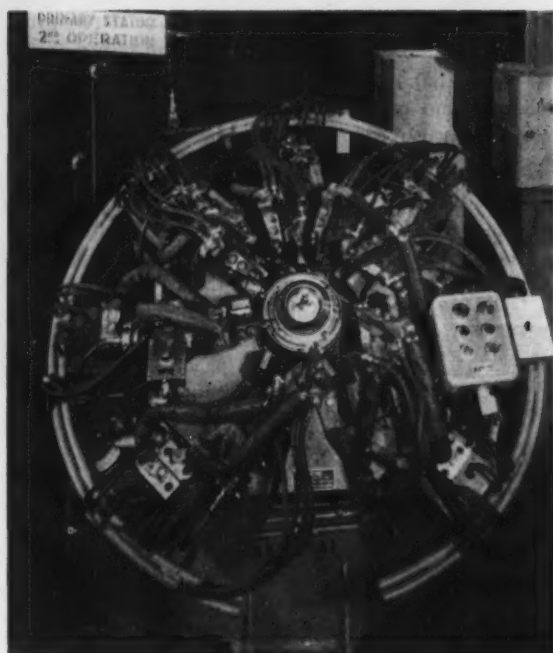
This is the arrangement used in welding the vanes of the primary stator to the shells.
